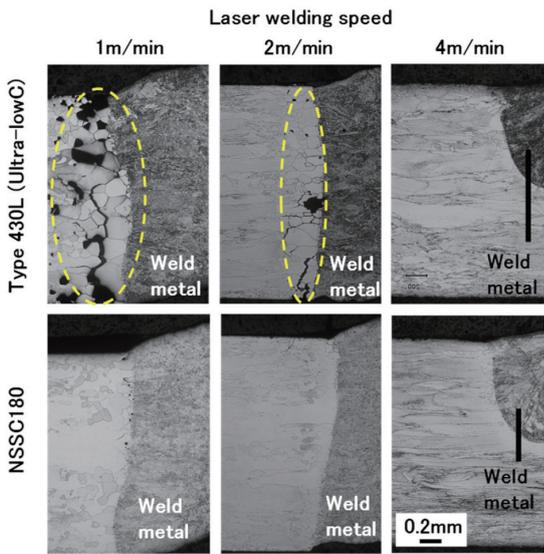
Effect of laser welding speed on the corrosion resistance of Type 430L and NSSC180³²⁾
